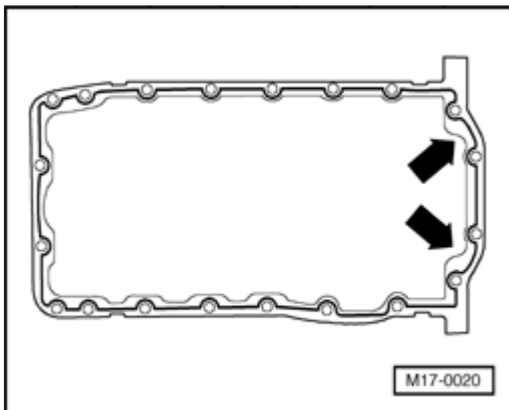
Applying Sealant To Inside Path Of Bolt Holes
